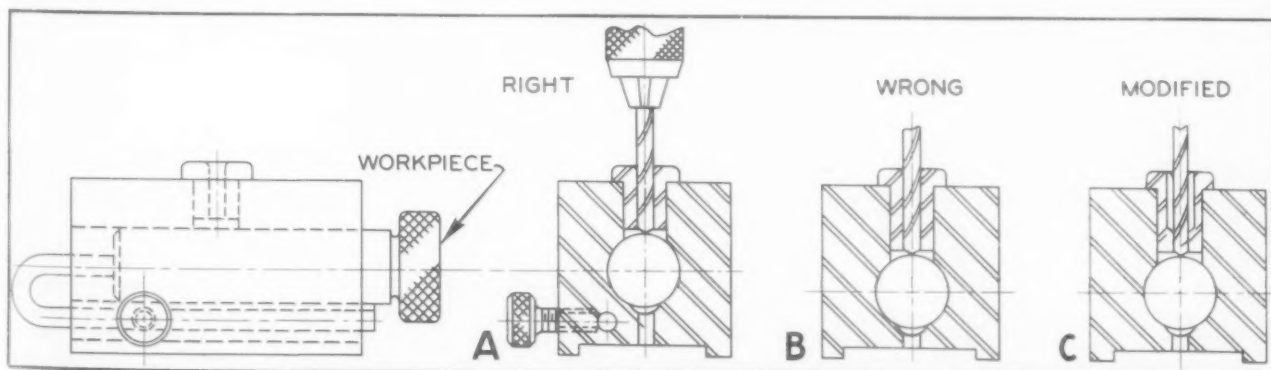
Drill jigs for stainless steel, of which a simple type is shown at A, should be provided with short drill bushings, as suggested at B. The bushing shown at C would be too long; however, it can be relieved, as shown at C. Because the material is tough, drills should be short since long drills tend to flex and, therefore, will eventually break.
